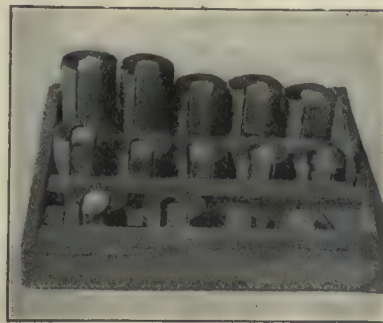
SET OF SPACING BLOCKS FOR MACHINING DIFFERENT HEIGHTS
